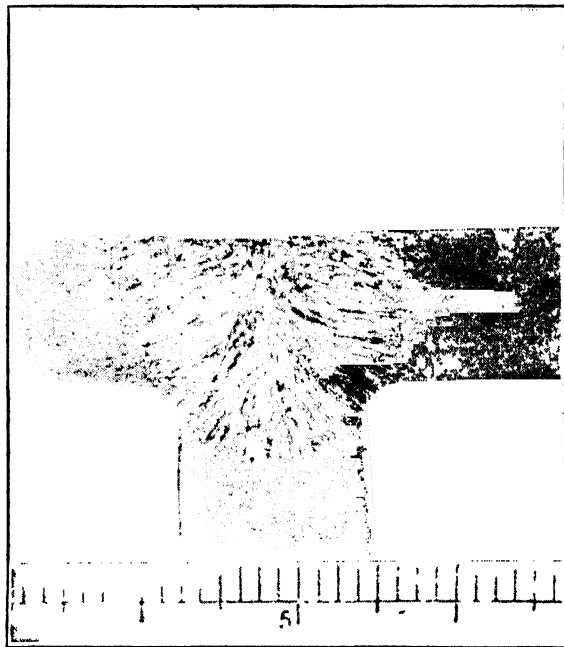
Macrograph of automatically welded T joint in engine crankcase.
